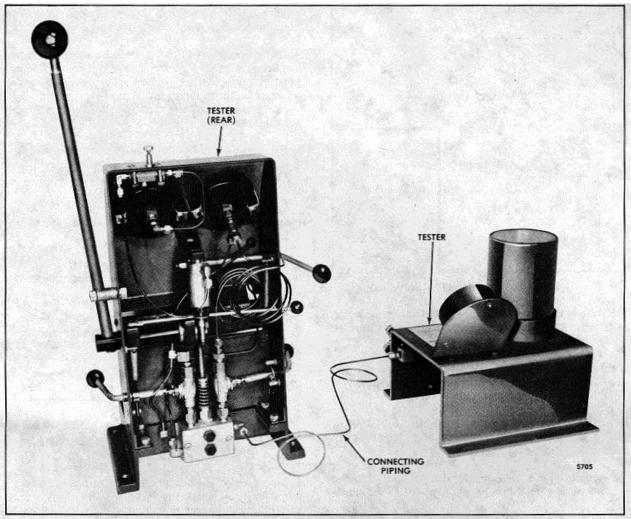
Injector Needle Valve Tester J 23010 with Auxiliary Tester J 22640
